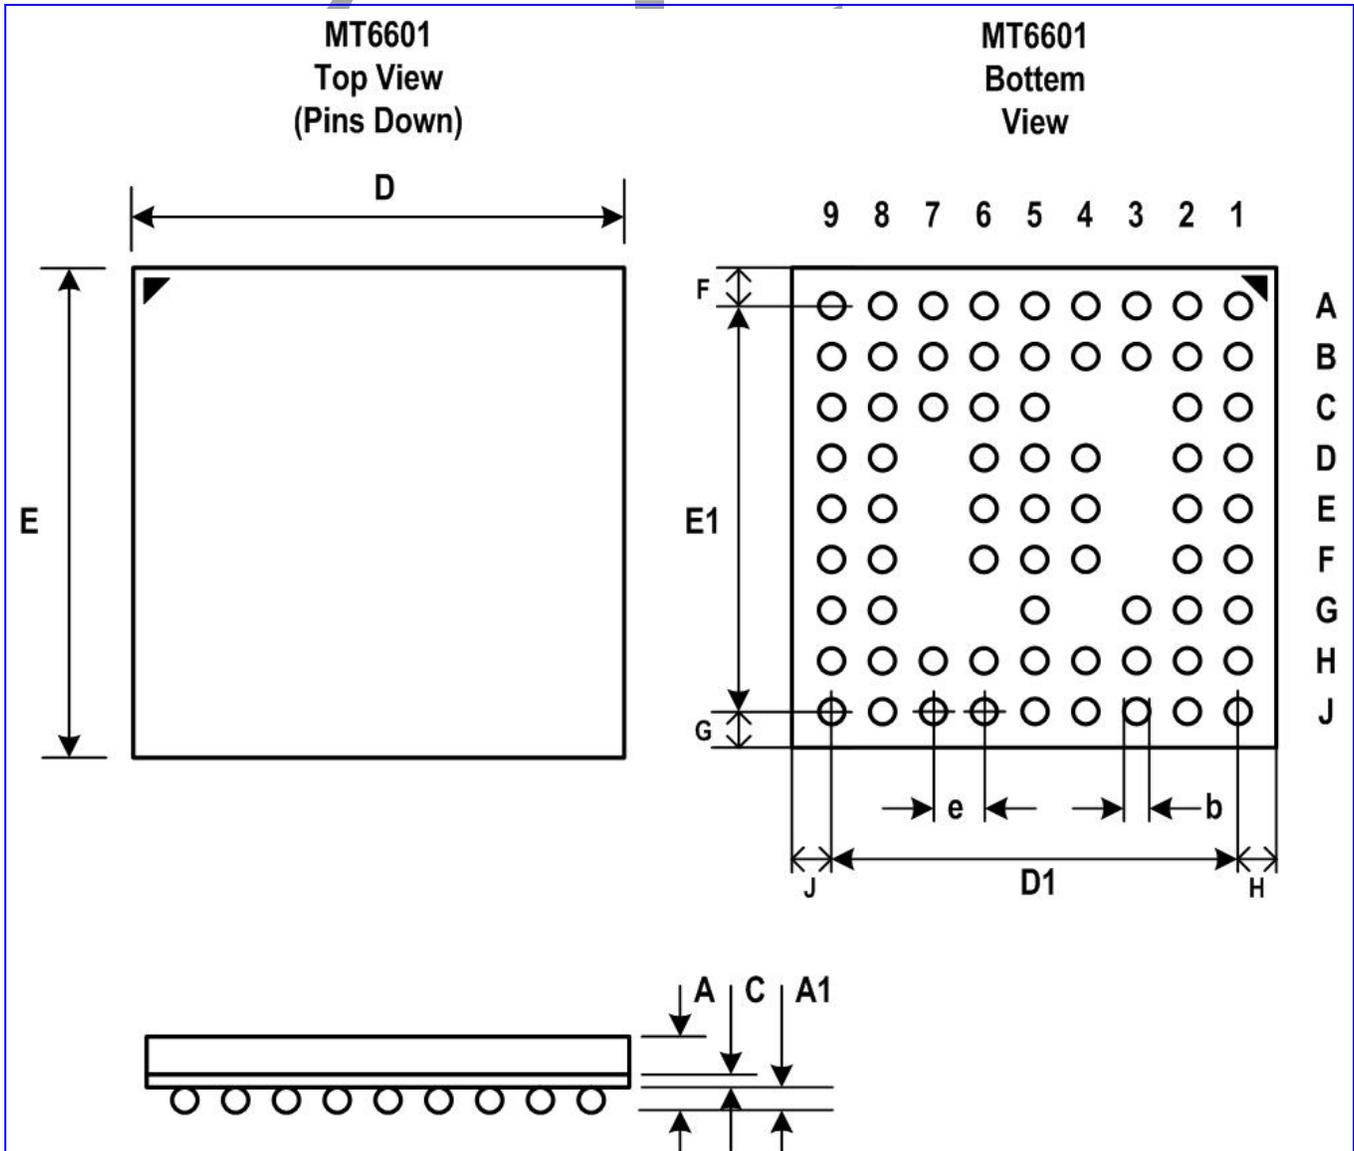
Package outline and dimensions of TFBGA 5mm x 5mm, 70-ball, 0.5mm pitch Package
